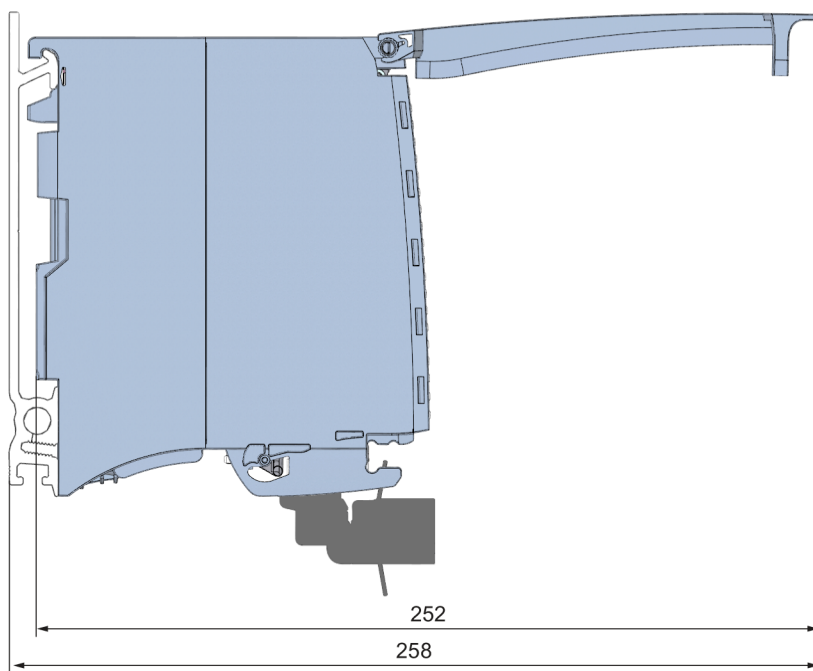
Dimensional drawing of the AI 8xU/I/RTD/TC ST module, side view with open front panel
